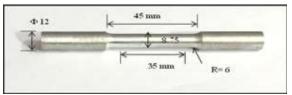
Dimensions of tensile specimen in (mm) according to ASTM (A370-11).
